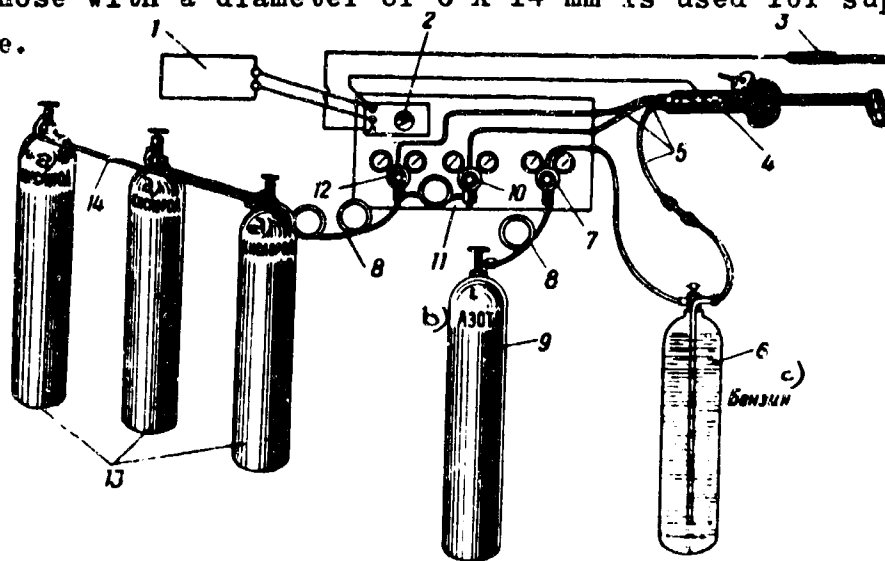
Assembly System for BUPR installation for Underwater Gasoline Oxygen Cutting: 1 - battery; 2 - voltmeter; 3 - igniter; 4 - cutter; 5 - hoses; 6 - tank with gasoline; 7 - reducing valve for nitrogen; 8 - coils; 9 - tank containing nitrogen; 10 - reducing valve for heating oxygen; 11 - control panel; 12 - reducing valve for cutting oxygen; 13 - oxygen tank; 14 - collector (or ramp in the case of a large sampling of gas). Key: a) oxygen; b) nitrogen; and c) gasoline.
